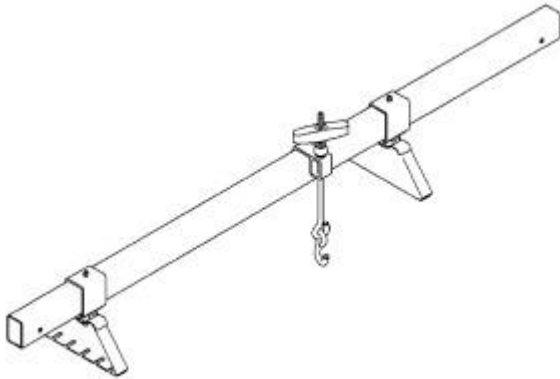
SUPPORT FIXTURE, ENGINE - 8534B
